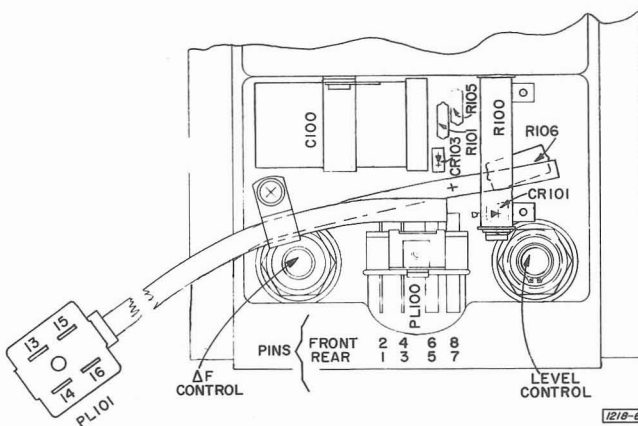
Detail part placement between front panel and casting, as seen with panel removed.
